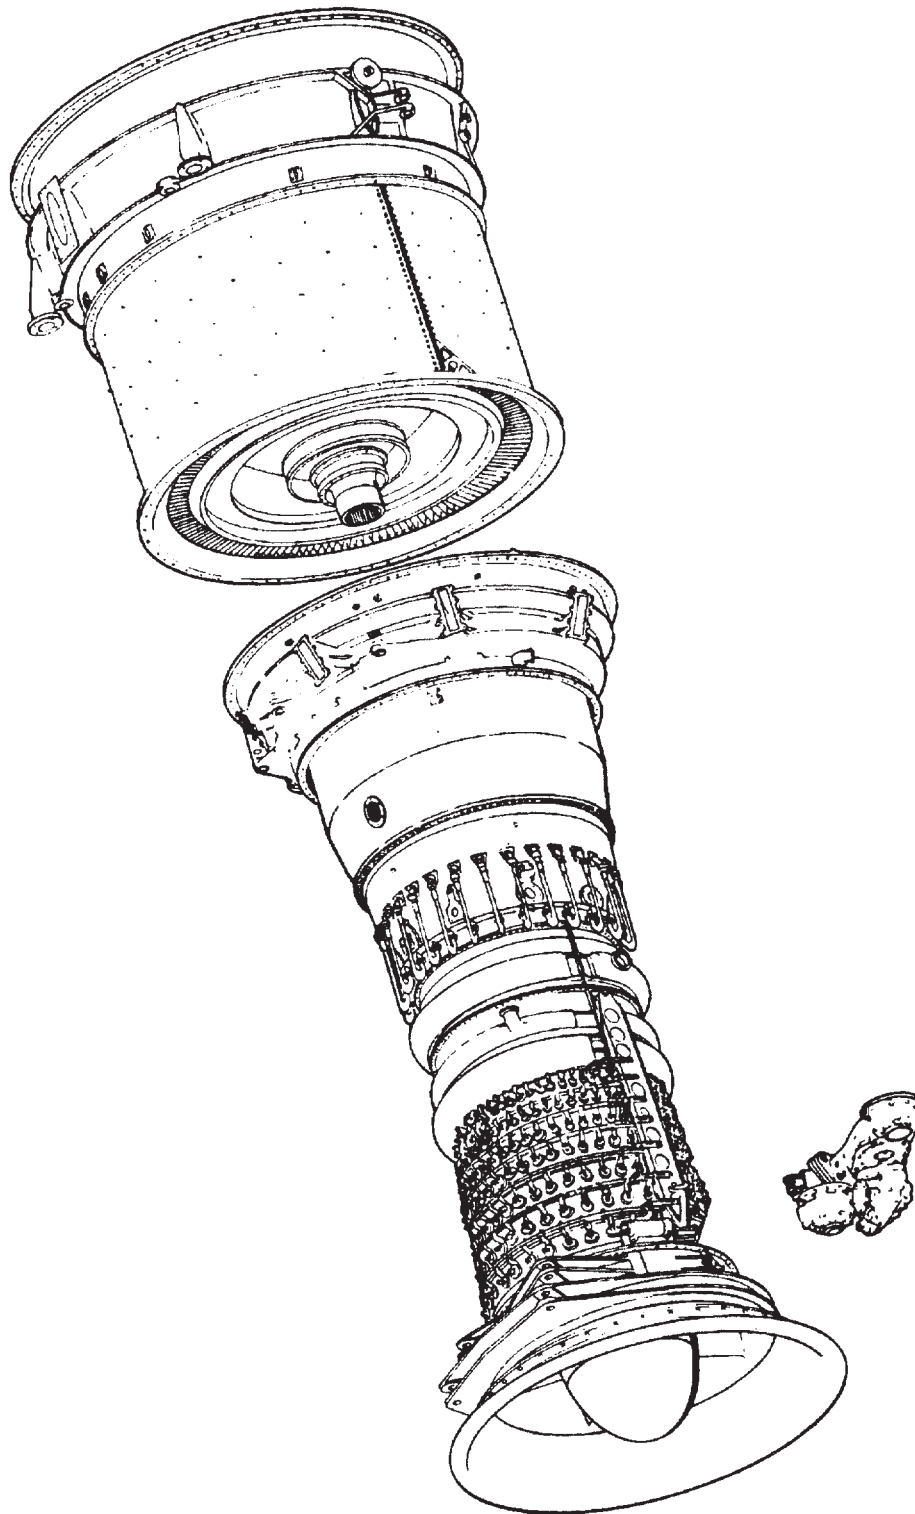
Typical Modularized Engine Concept (GE LM 2500)
